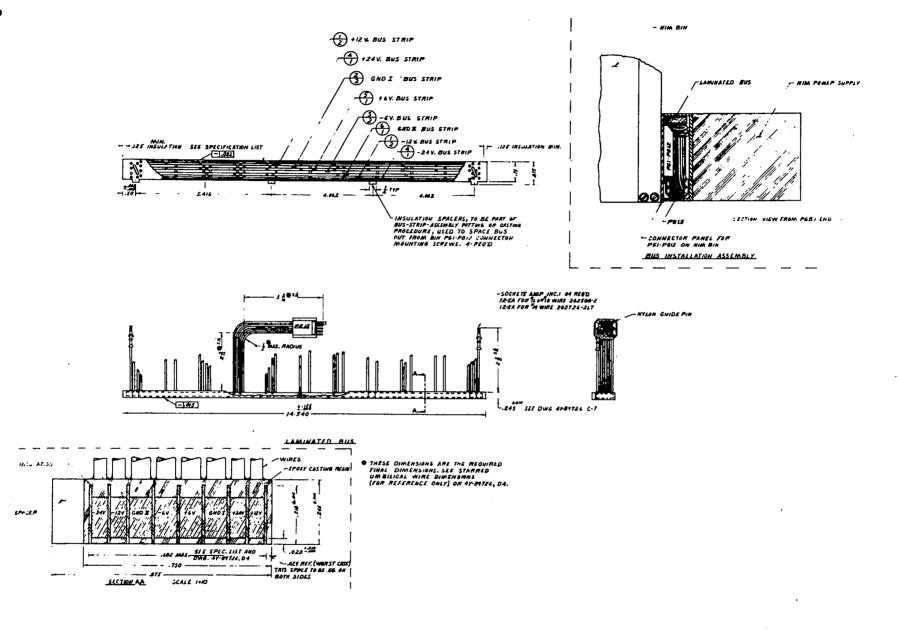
4Y-89726, D3 - Laminated bus assembly.
